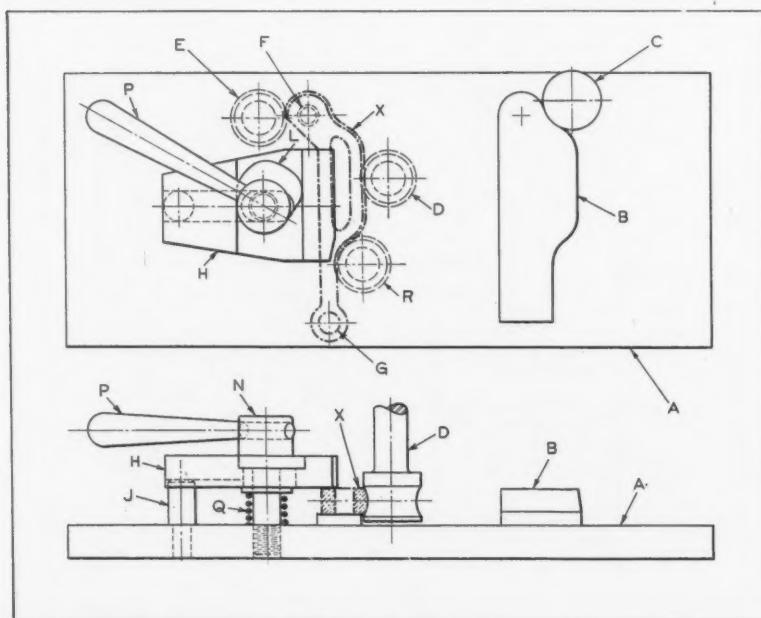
Profiling Fixture with Clamp that is Moved into Position and Tightened by Single Movement of Lever
